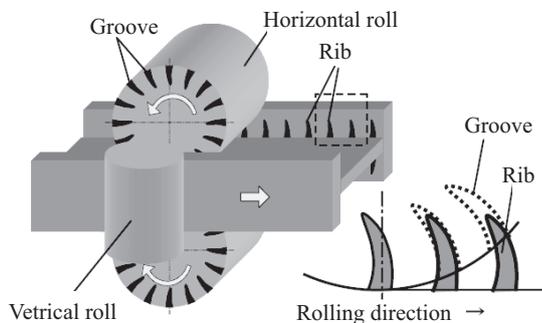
Formation method of ribs on H-section steel shape by universal finishing mill
